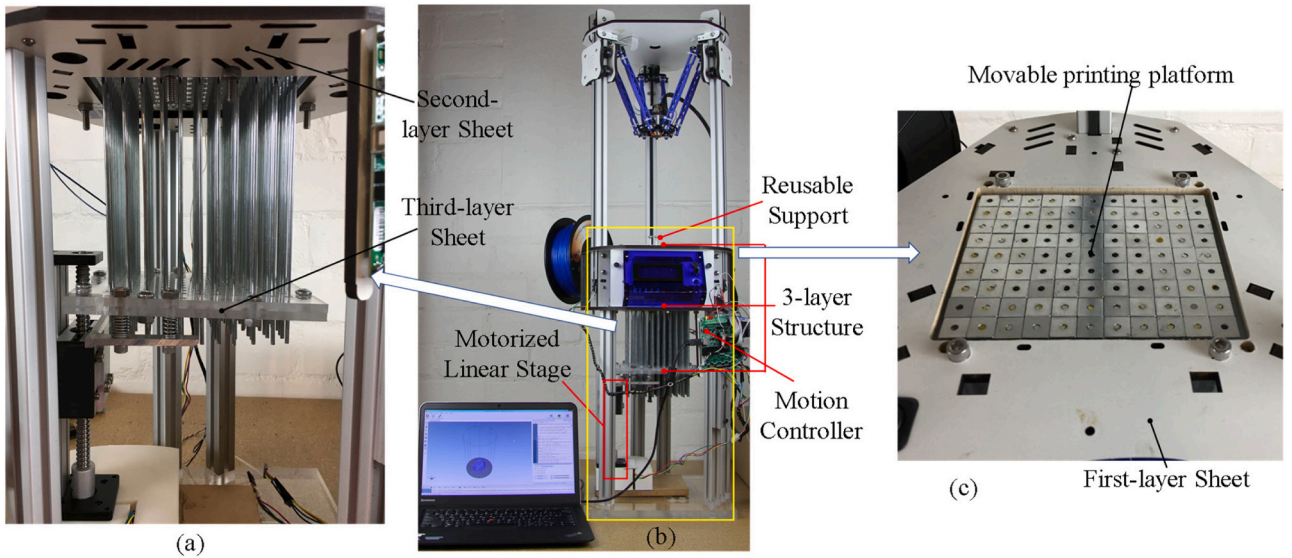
A prototype system with reusable support. (a) The second-layer and third-layer sheets of the reusable support. (b) A revised FFF 3D printer with reusable support. (c) The building platform is defined by 11×9 metal pins (For interpretation of the references to color in this figure legend, the reader is referred to the web version of this article).
